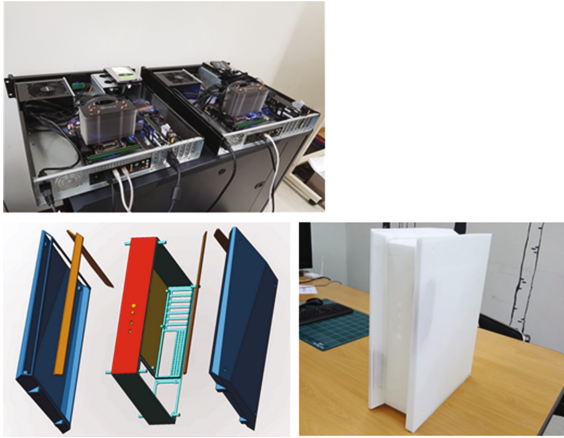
H/W prototype and 3D printing product of Abyss Storage.
